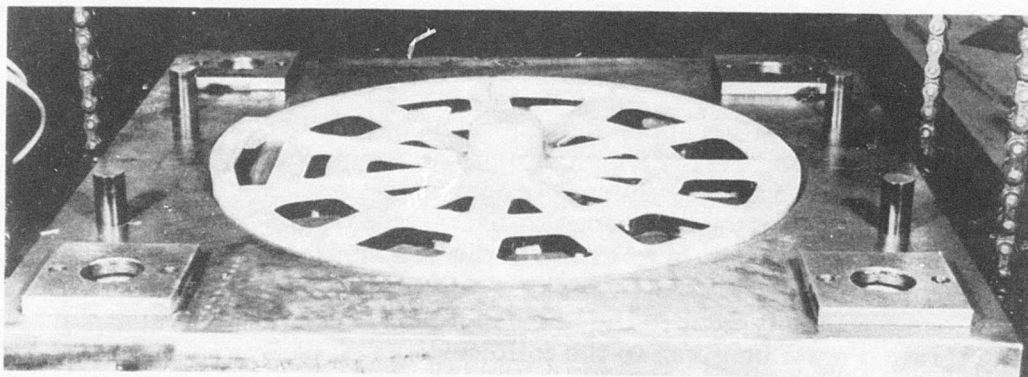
Molded Quadrant Sheave on Knock-Out Pins in Tool.
